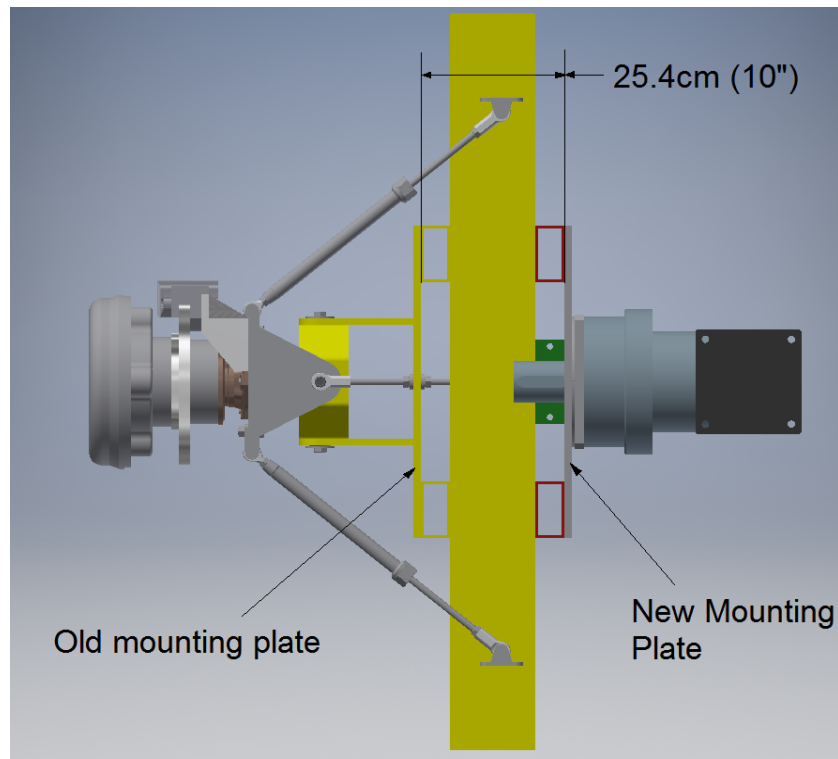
Top view: Assembly of new mounting plate and box channels.
